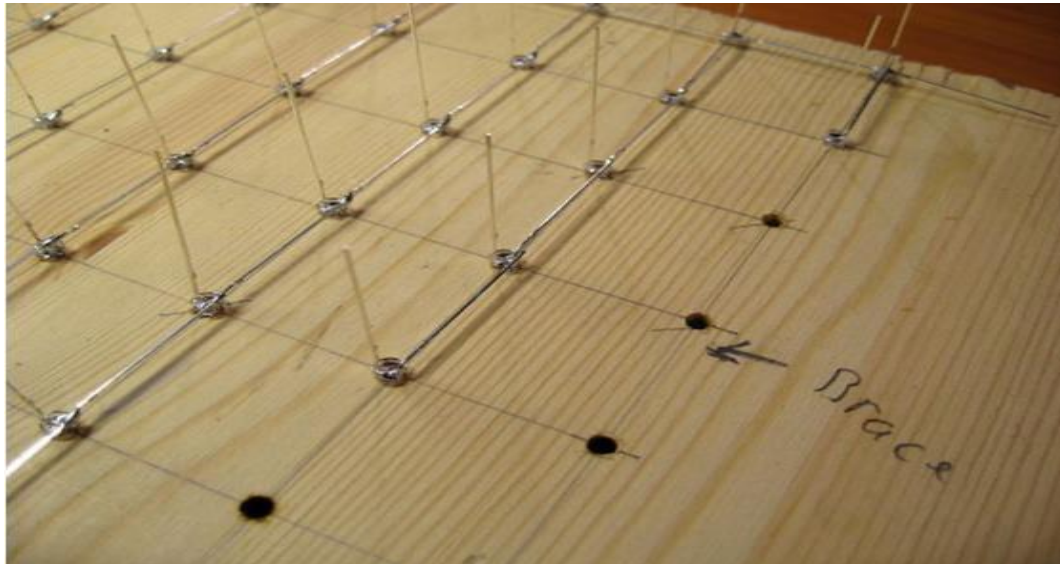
Using a piece of wood as a soldering jig for the LED cube.
